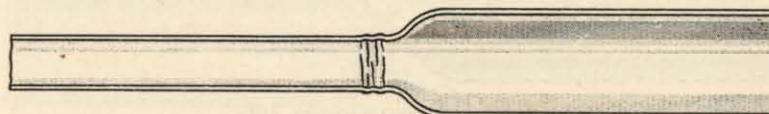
THE GLASS JOINT SHOWN IS TOO THICK, AND THE TUBES MUST BE PULLED SLIGHTLY APART
